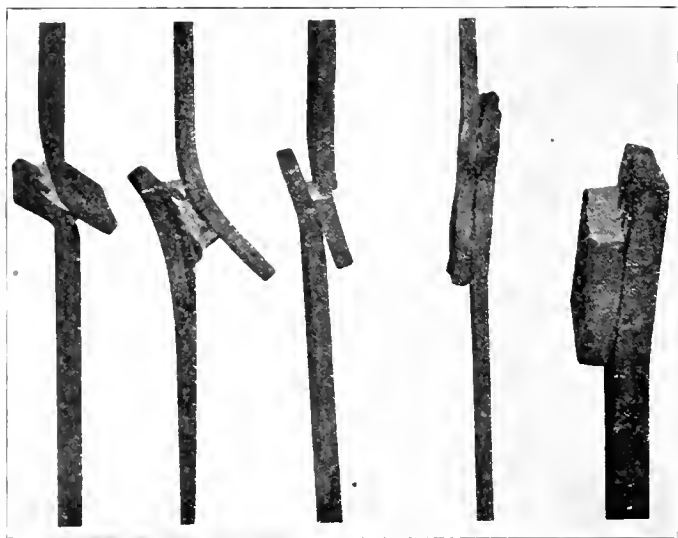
ELECTRICALLY WELDED STEEL PLATES AFTER BEING TESTED IN TENSION
